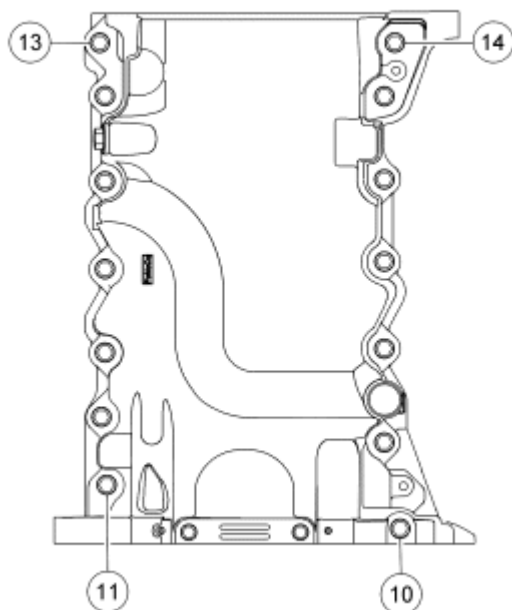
Installing Oil Pan Bolts 10, 11, 13 & 14 In Sequence
